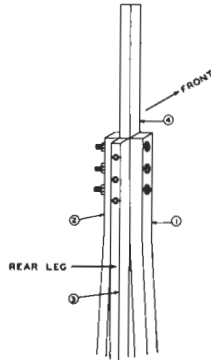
MIDDLE JOINT assembled. Use washers under all bolt heads and nuts.
